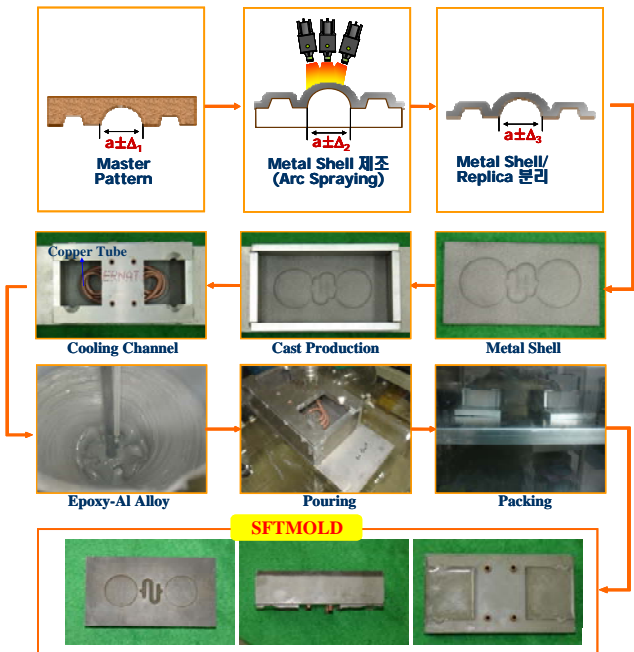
Procedure of spray-formed tooling and manufacturing process of SFT mold.
